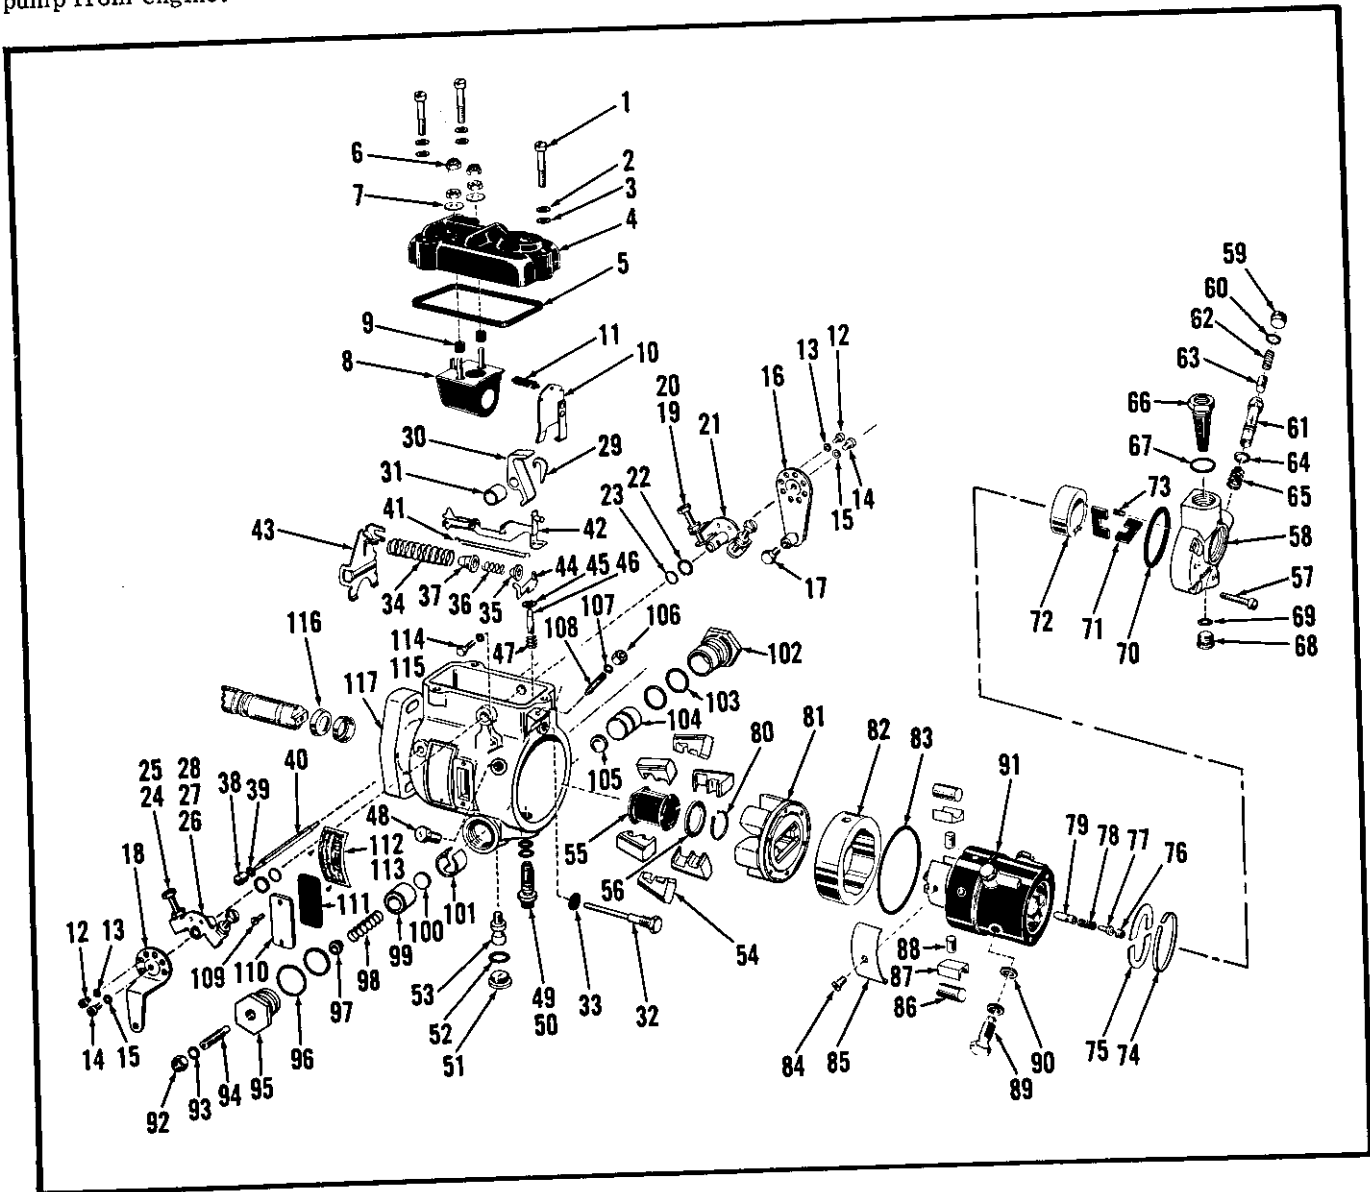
Fuel Injection Pump, Disassembly and Reassembly
